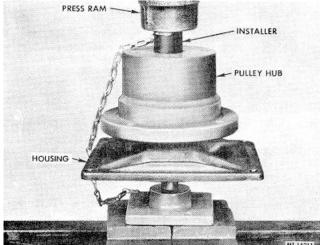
Installing Pulley Hub on Shaft Using SE- 1950 Installer and Support Fixture
